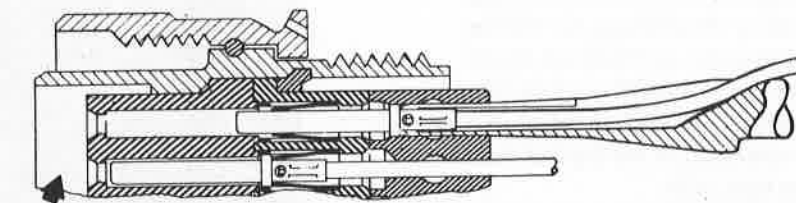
Removing contact pins. Releasing the retention system from the rear assures that the intermating seal on either the socket or the pin insert is not damaged by the contact removal tool. (The Deutsch Co.)
